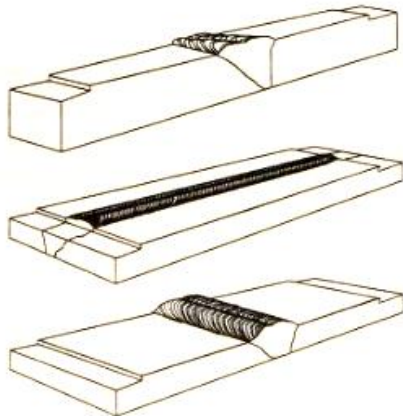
Different specimen geometries for bend specimens with welds.
